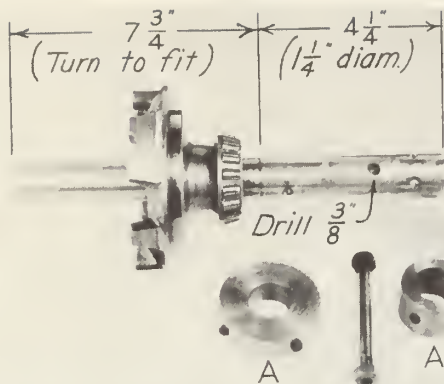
Countershaft machining dimensions. The location of the 3/8-inch drilled hole will be as required to bolt the hub of the large sprocket to the shaft. The bore of set collars A is 1-1/4 inch; the outside dimensions are not important.
